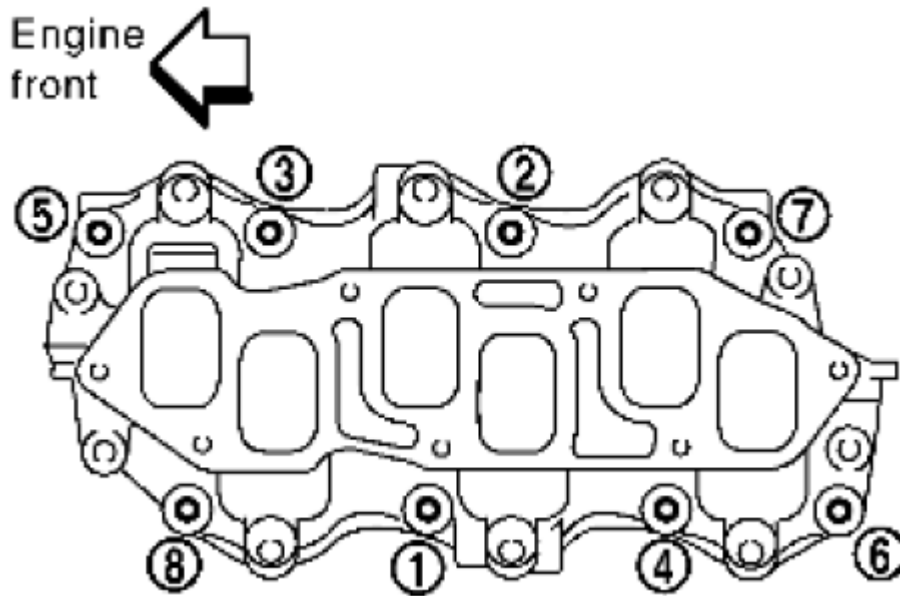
Identifying Intake Manifold Nuts And Bolts Remove Sequence
